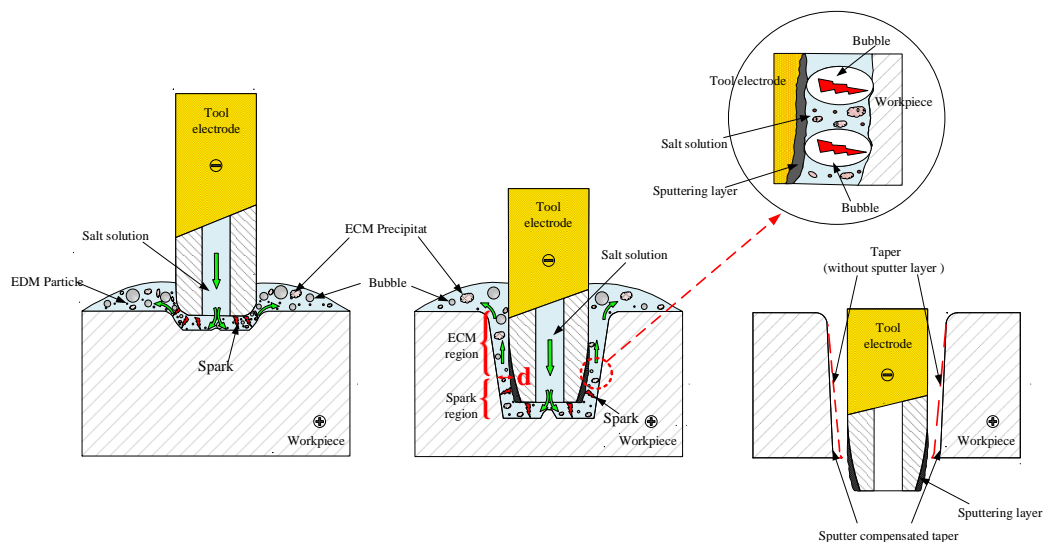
Mechanism of the tool electrode wear in high-speed electrochemical discharge machining.
